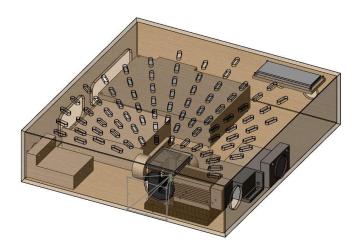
CAD model of completed projector, including laser-cut wooden box design.
